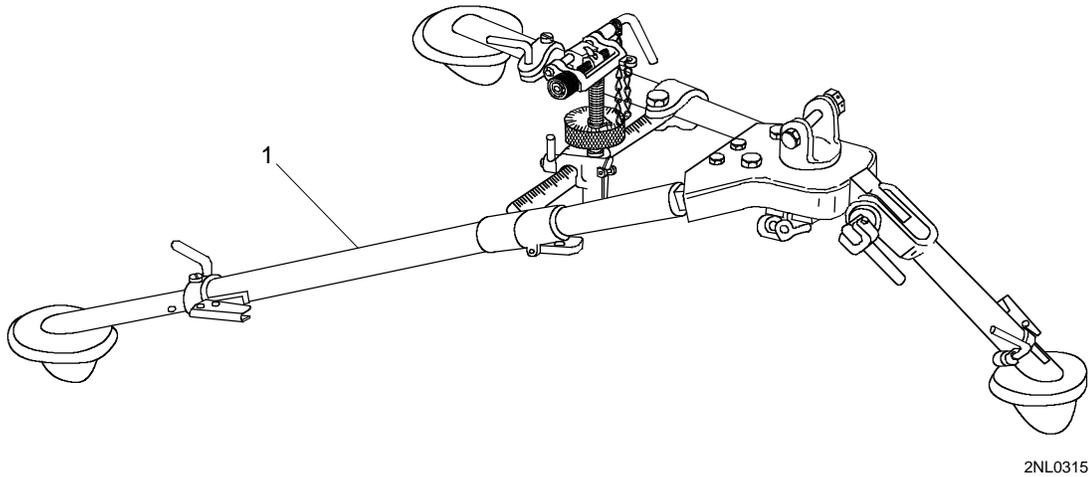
Tripod, Machine Gun, M3, (Assembled View), P/N 8403398
